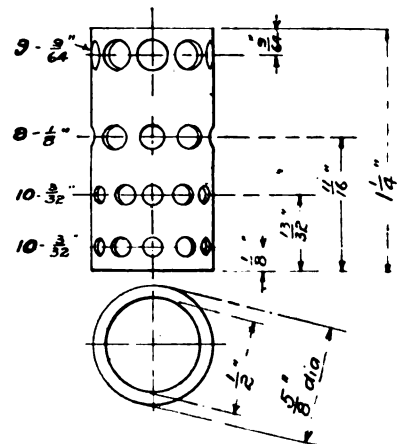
LINER OF JET CONDENSER FOR HOLDING NOZZLES. (Full size.)
